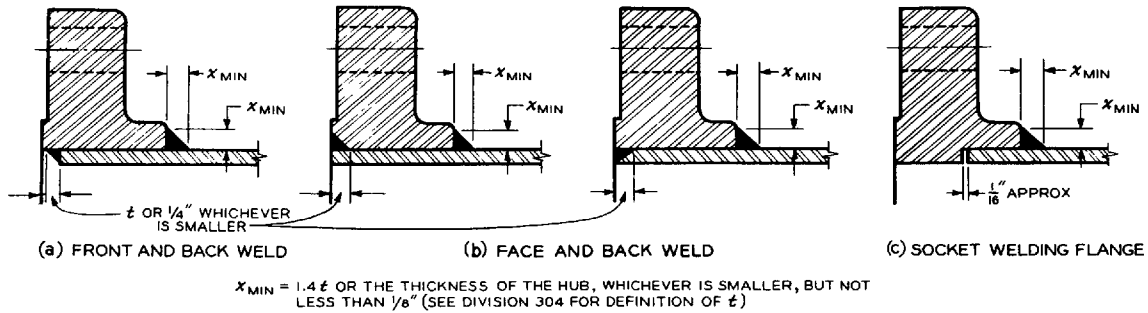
B WELDING DETAILS FOR SLIP-ON AND SOCKET-WELDING FLANGES
